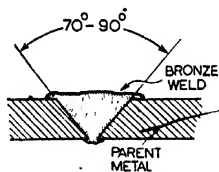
CROSS SECTION THROUGH THE BRONZE WELD SHOWING ANGLES OF V PERMISSIBLE
